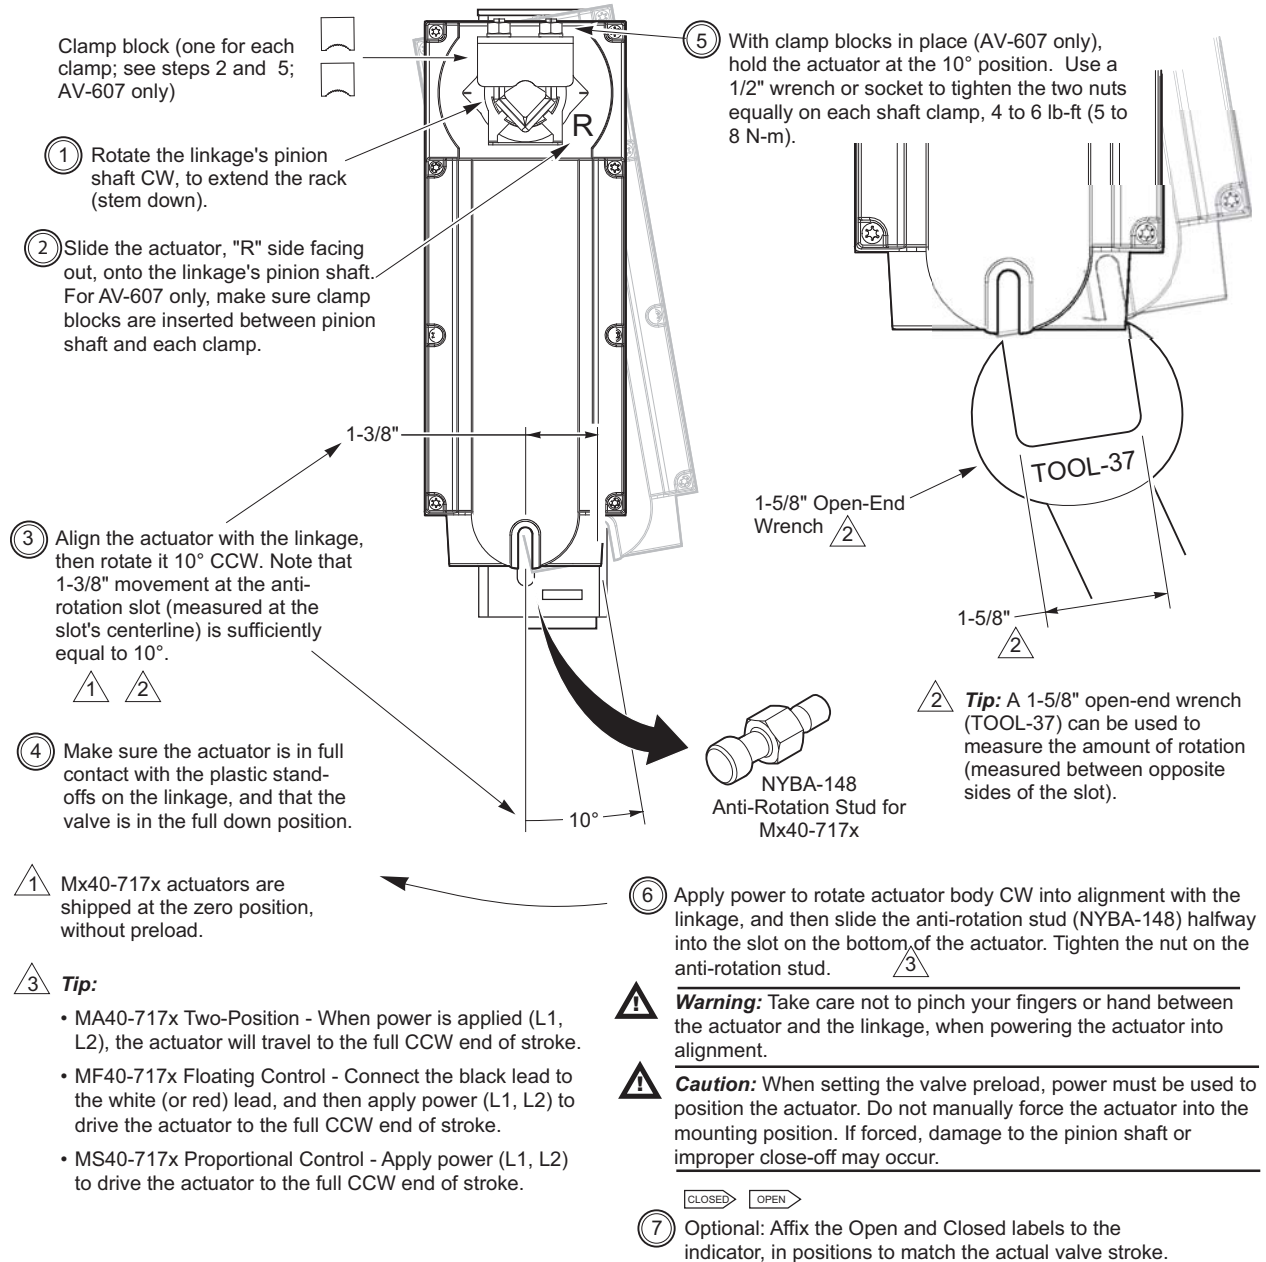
Mounting Mx40-717x and Setting Up Actuator/Linkage/Valve Assembly
